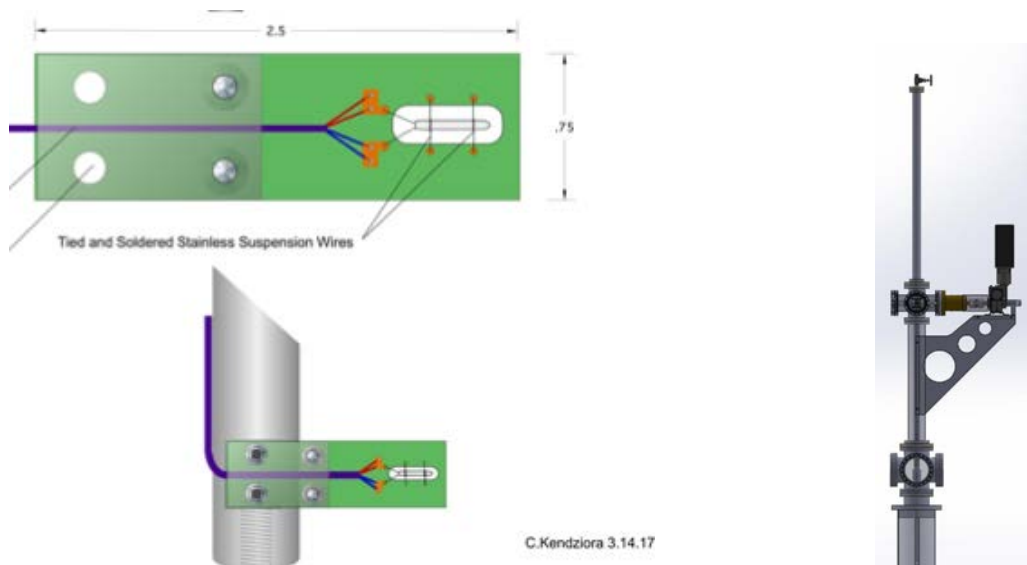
Left: sensor mounted on a PCB board and PCB board mounted on the rod. Right: the driving mechanism of the dynamic T-gradient monitor, consisting of a stepper motor driving the pinion and gear linear motion mechanism.
